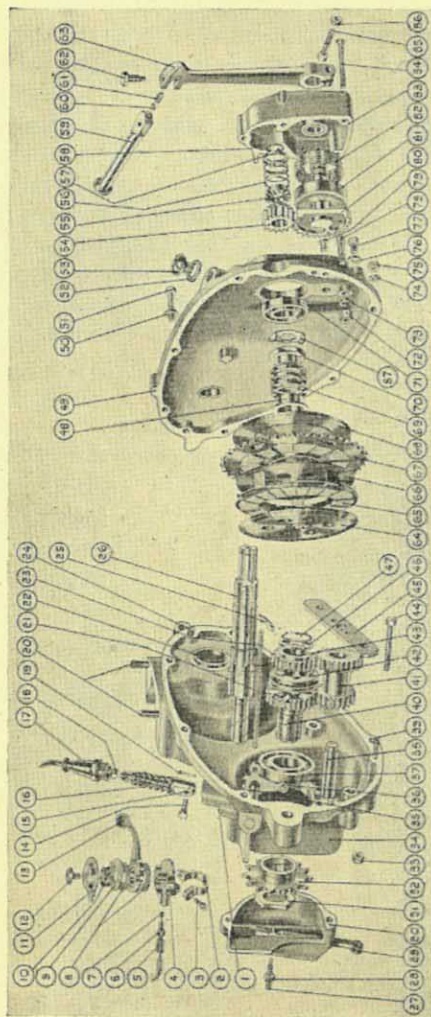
EXPLODED VIEW OF GEARBOX, MARK 1F ENGINE-GEAR UNIT.
